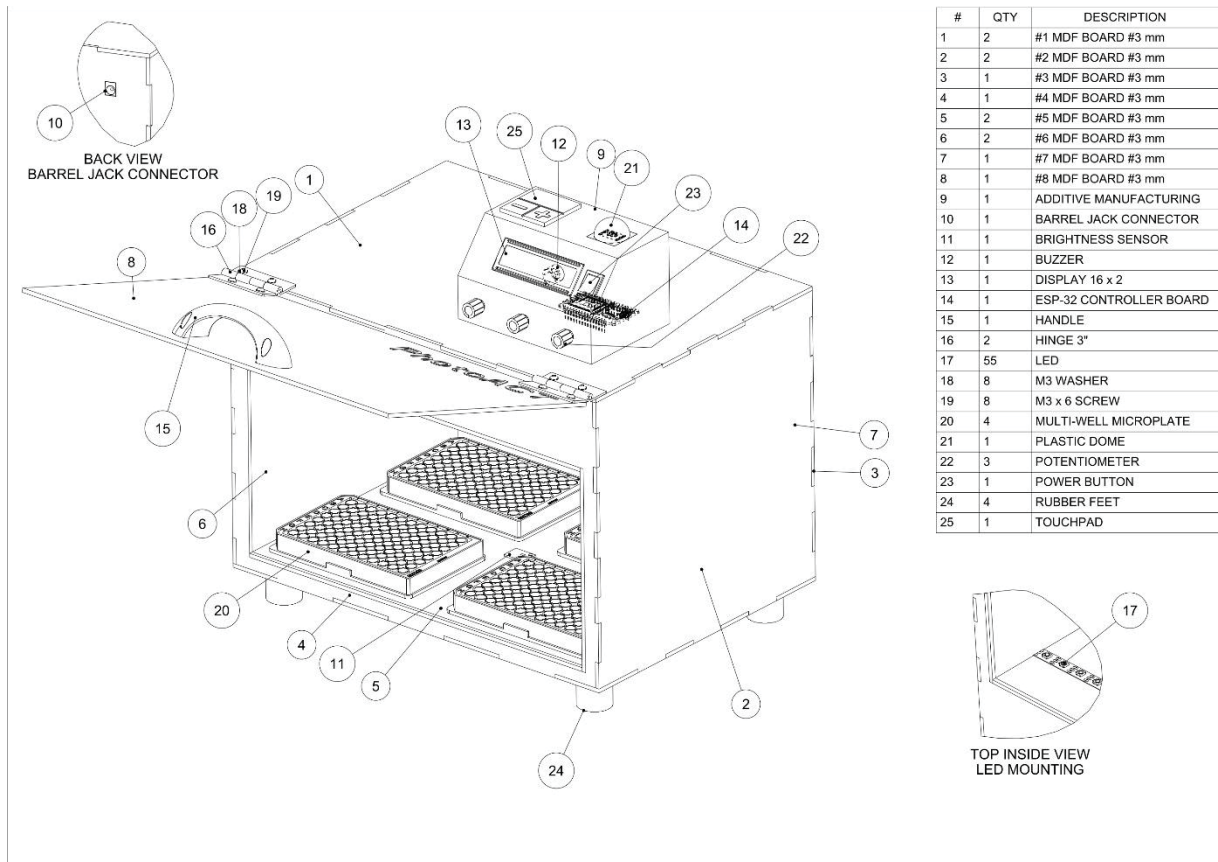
Photoact representation. Assembly drawing of the final product design with bill of materials, labelling balloons, and detailed view of the upper interior LEDs. The figure allows to identify parts and components of the prototype.
